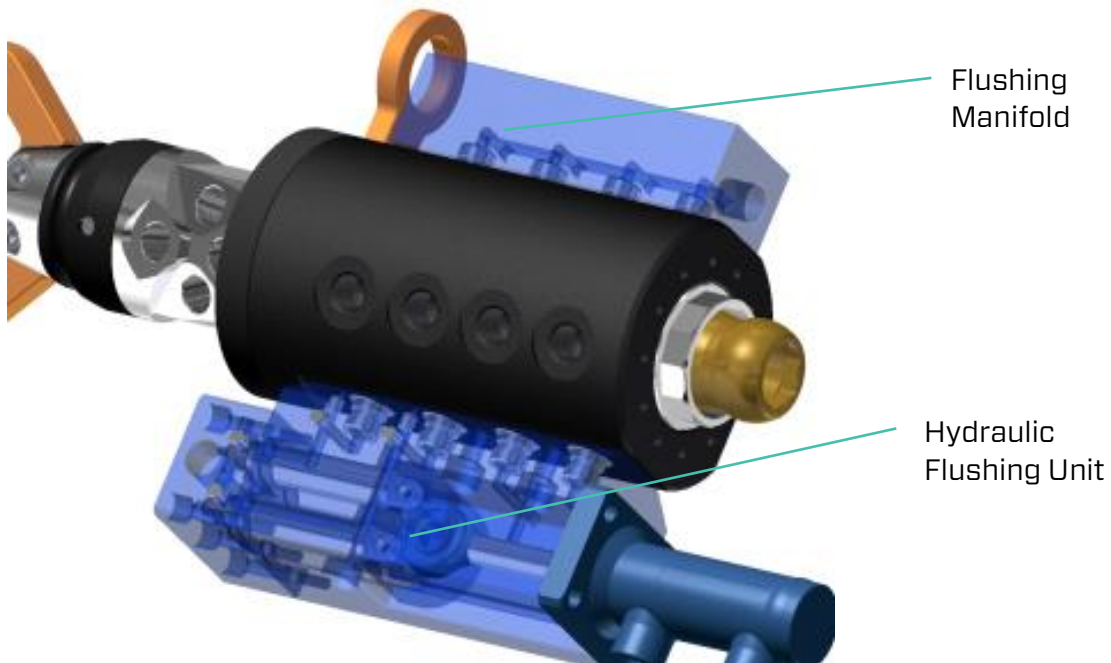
Hydraulic operated Valve Stab™ Cavity Flushing Unit, principle drawing
